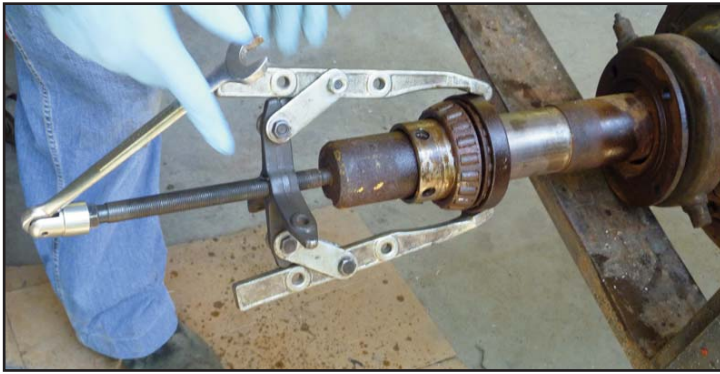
Double-row tapered roller bearing being removed by means of a mechanical puller.
